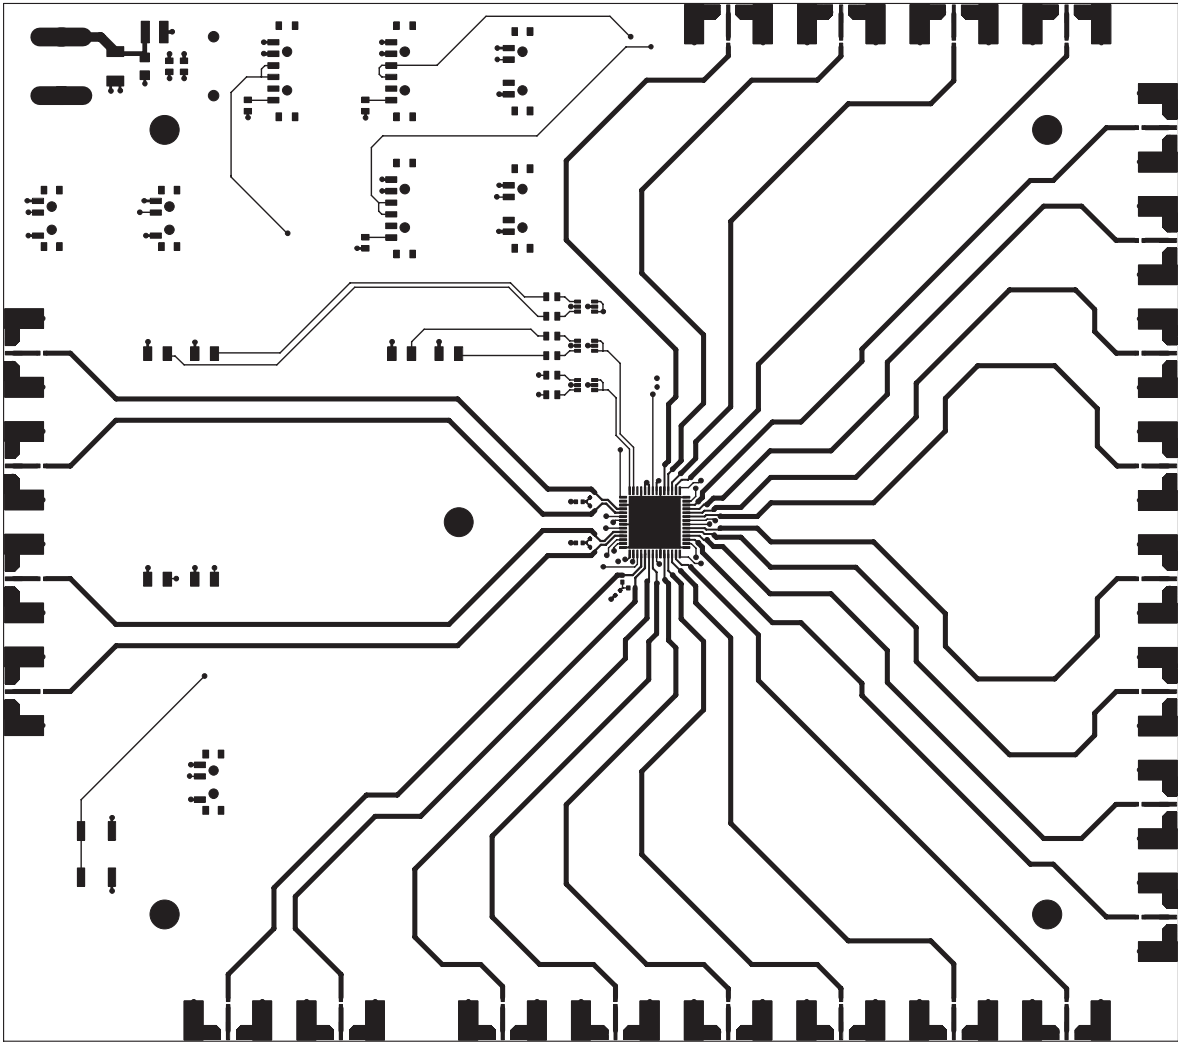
MAX3673 EV Kit PCB Layout—Component Side
